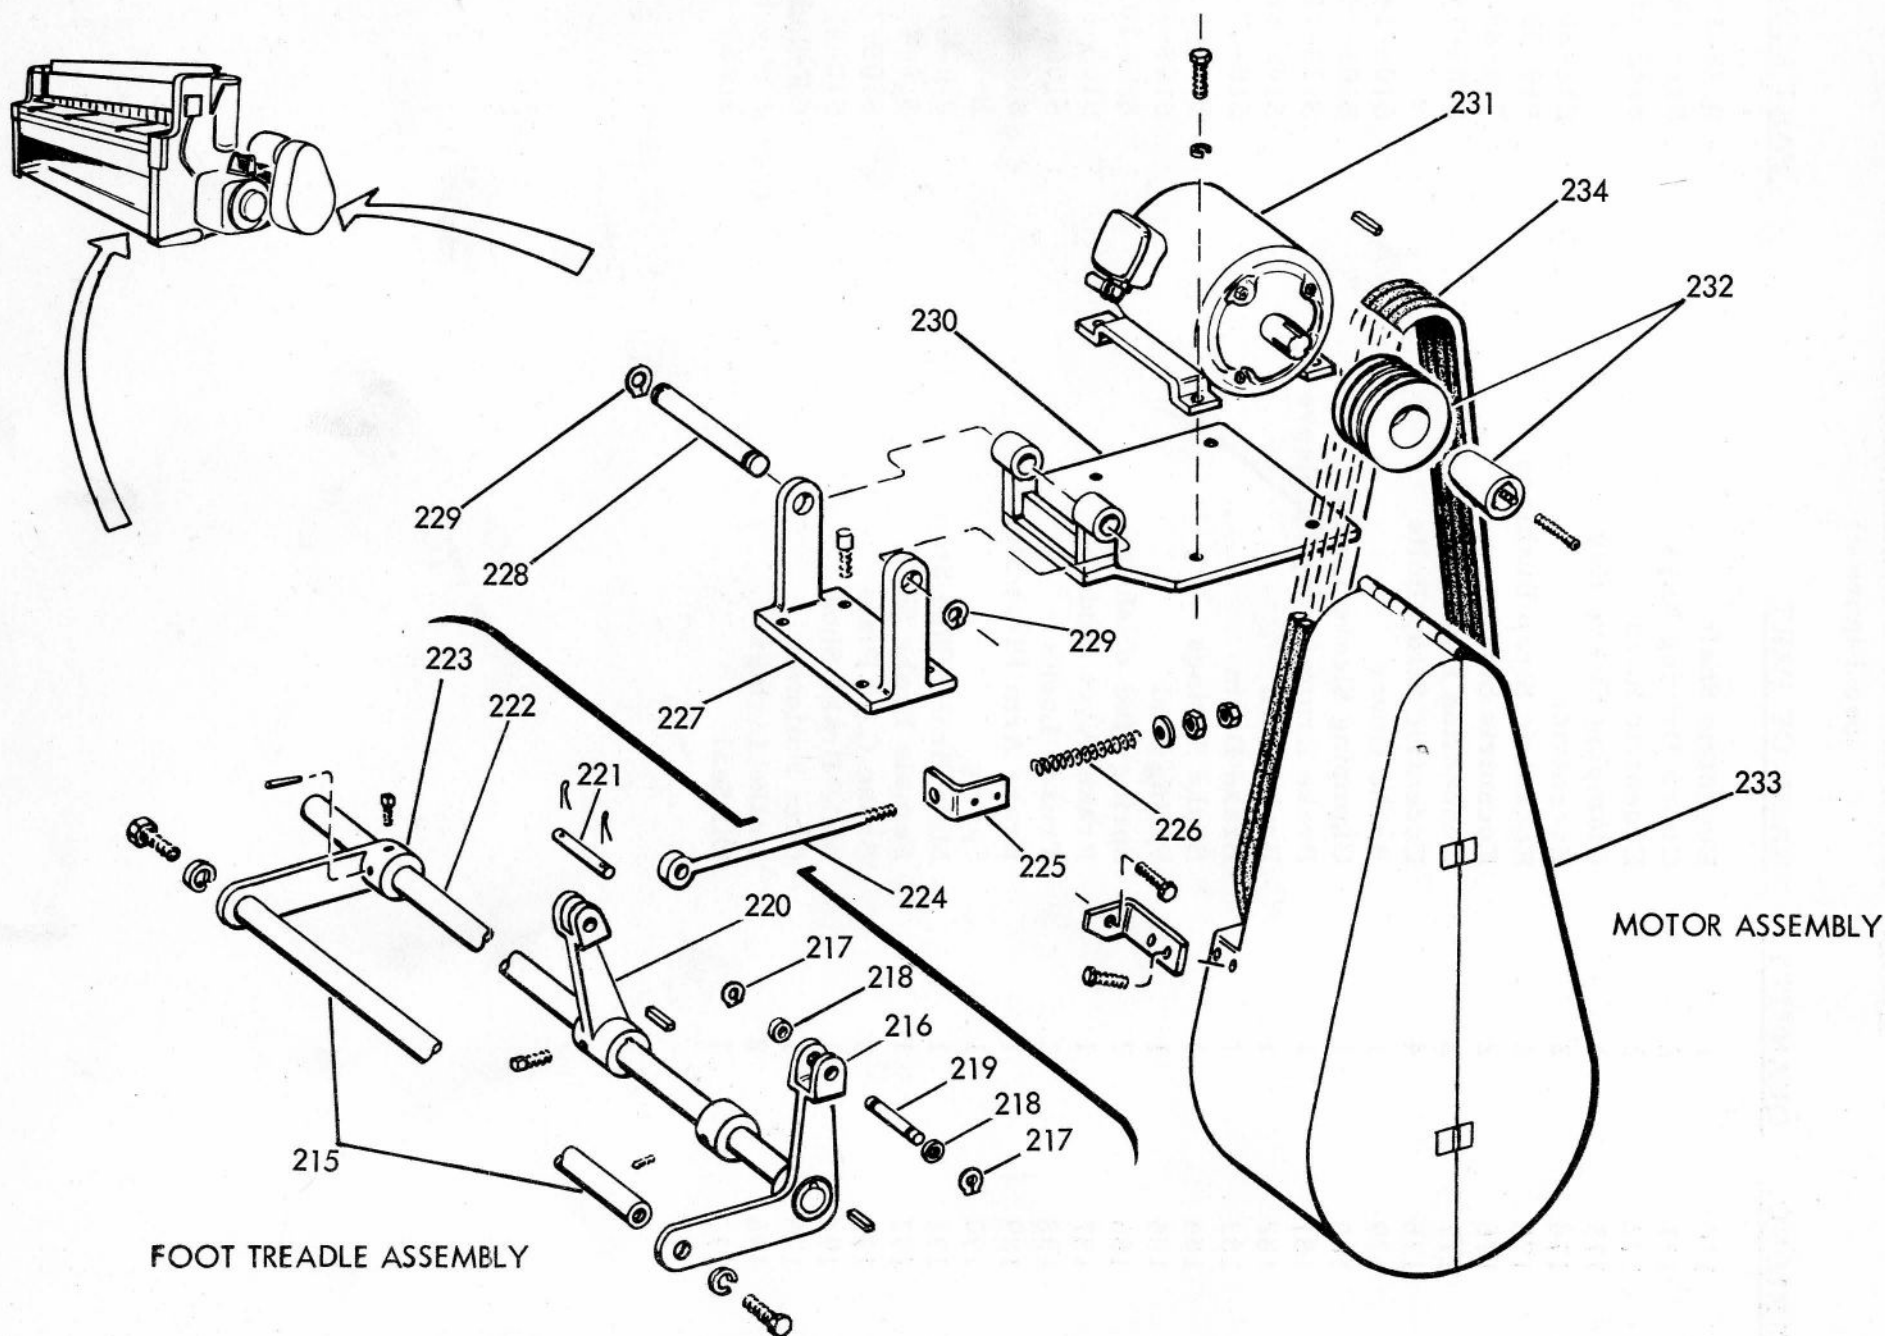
FOOT TREADLE ASSEMBLY - MOTOR ASSEMBLY
